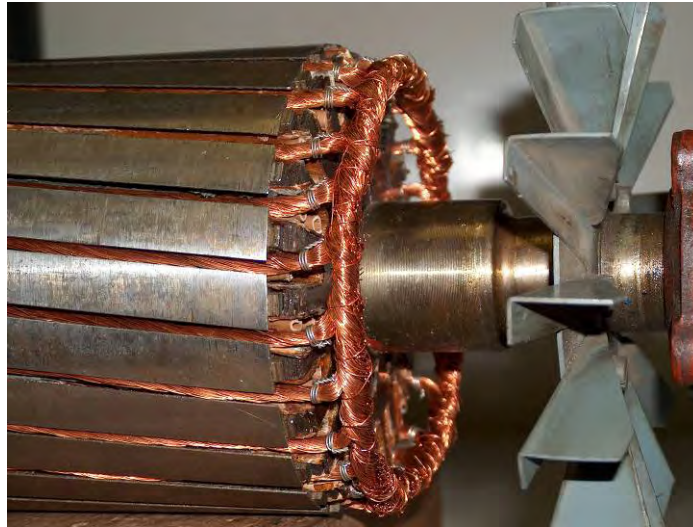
End-ring construction. Flexible multi-core cables were used, since they can be easily hand-worked and interwoven for end-ring manufacturing and permit better sensor allocation; tin-brazing was used for structure enforcing.
